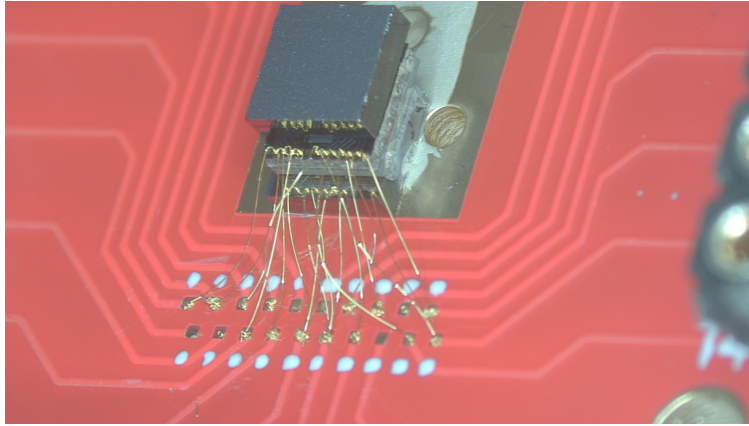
Overhead view of the die stack bonded to the PCB.
